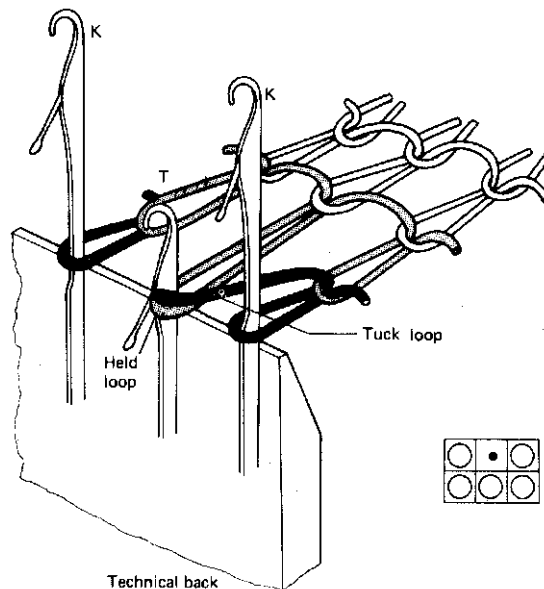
Tuck stitch produced on a latch needle machine.
